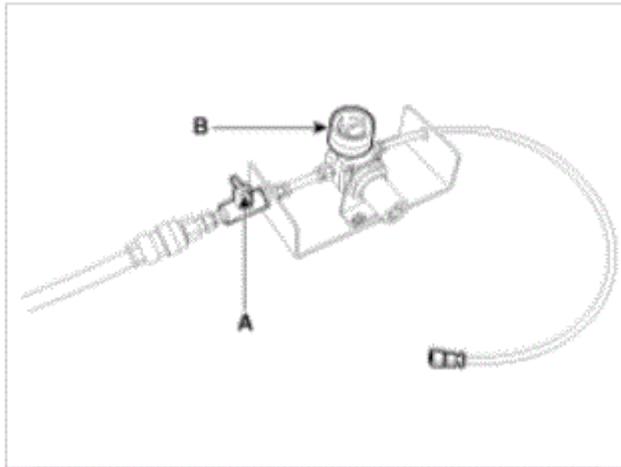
Air Shut-Off Valve, Pressure Gauge & Pressure Adjuster
